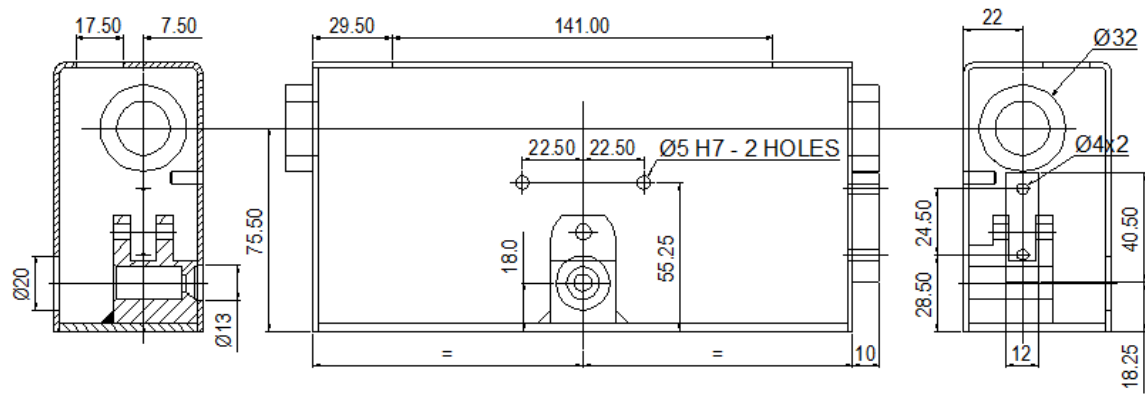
Bottom Cover with Operating Lever Mounting Bracket
